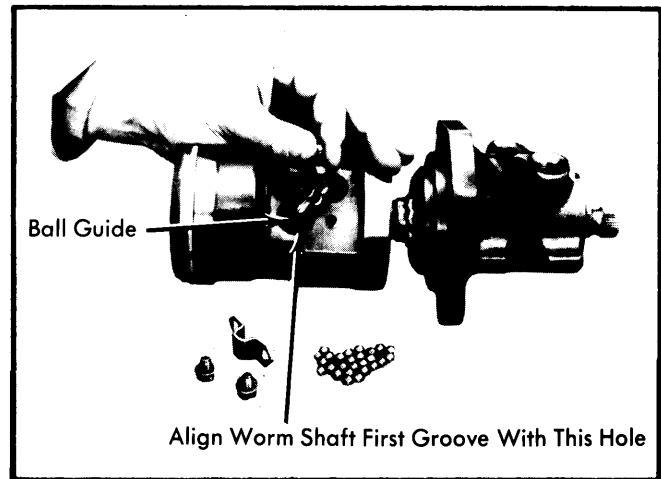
Installing Piston & Worm Shaft Ball Bearings
